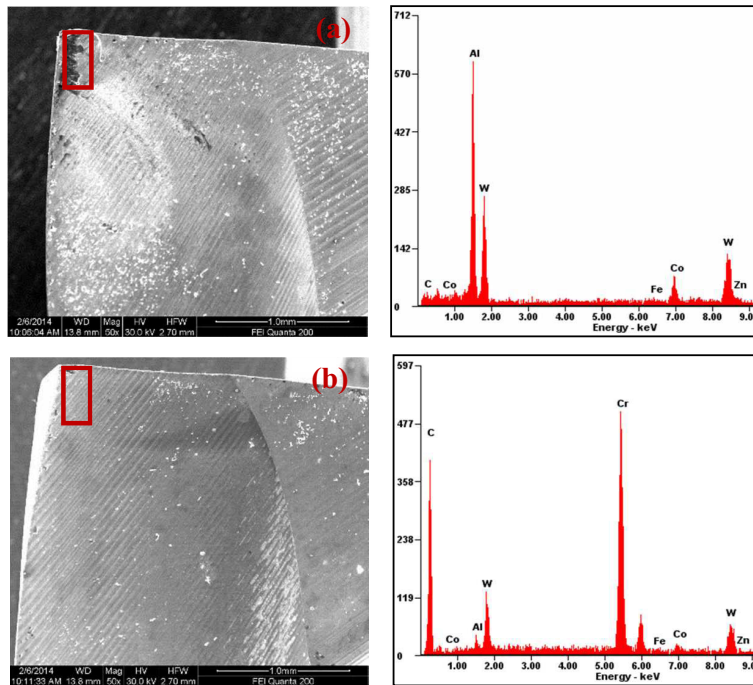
SEM images and EDS Spectra of uncoated carbide end mills after machining AA7075 using (a) uncoated and (b) DLC coated carbide end mills (cutting speed =60m/min; feed rate=200mm/min; depth of cut: 0.5 mm; width of cut: 10mm)
